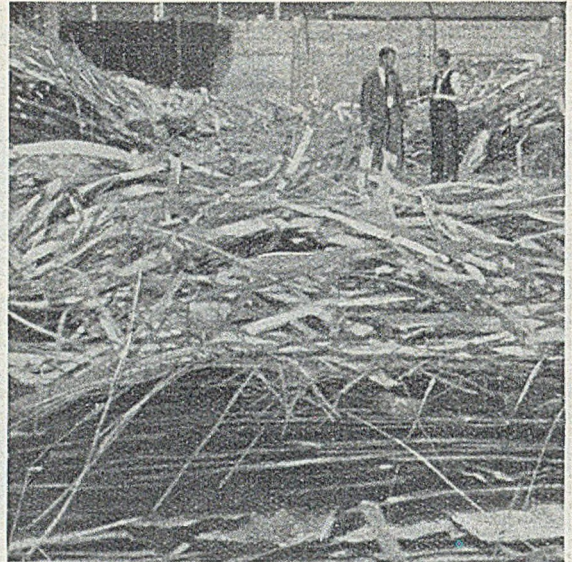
Scrap Sheet-aluminium Cuttings.
